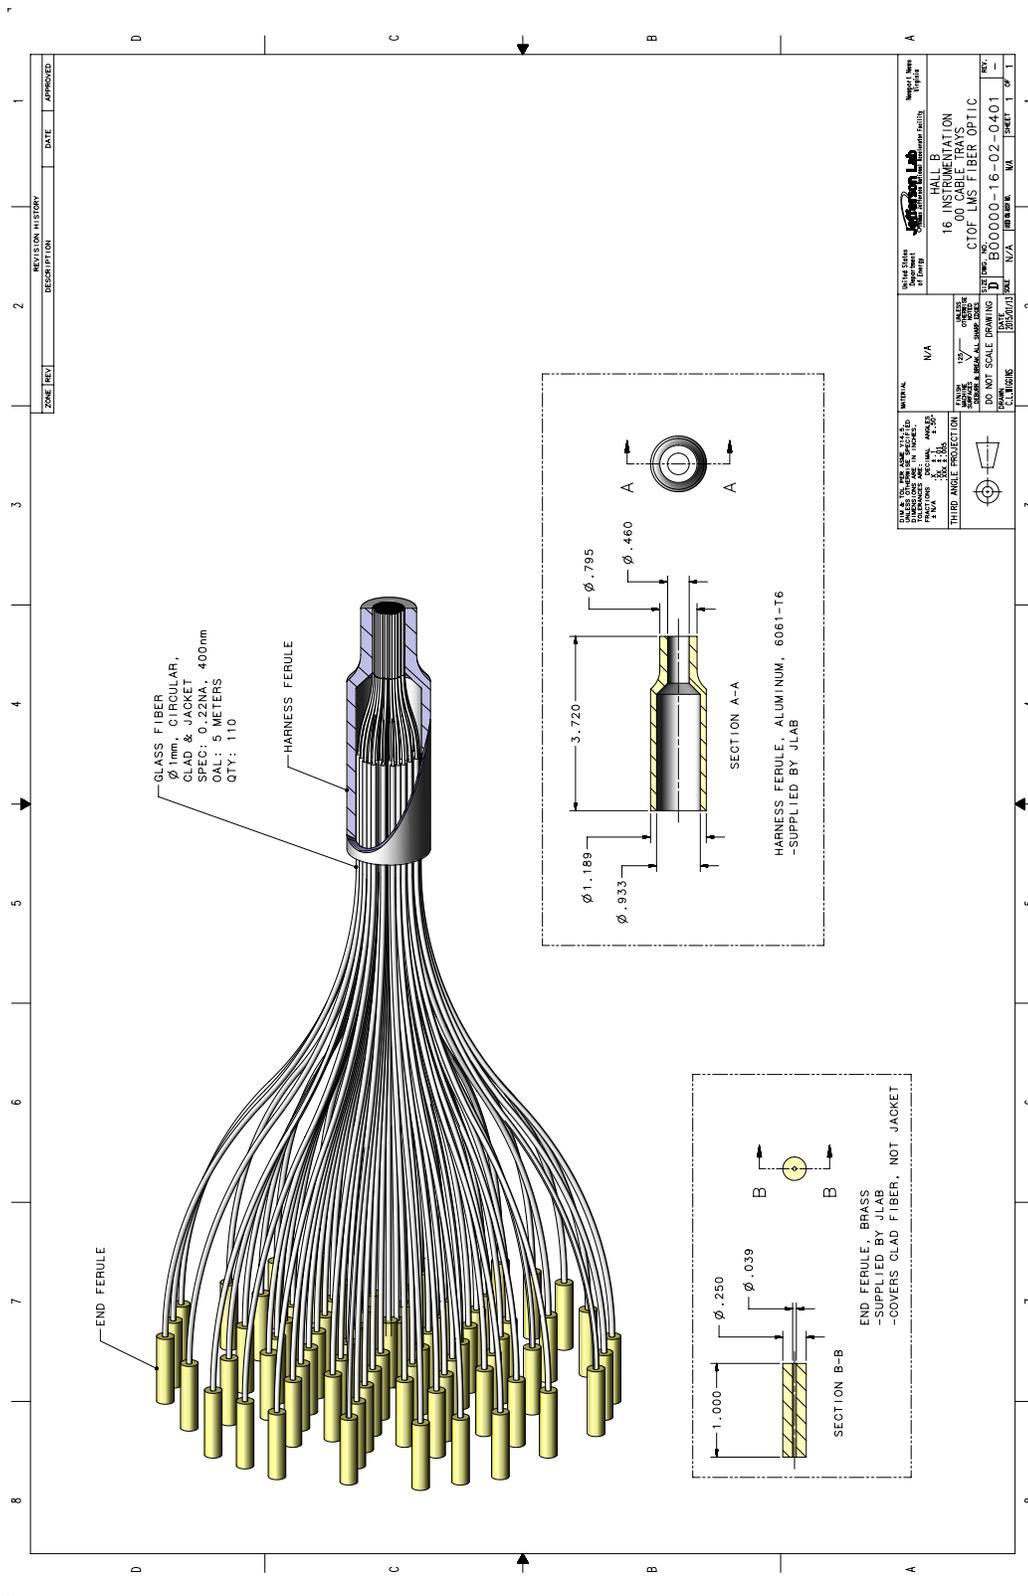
Schematic drawing of the CTOF LMS fiber bundle assembly. Ref. Drawing B00000-16-02-0401.
